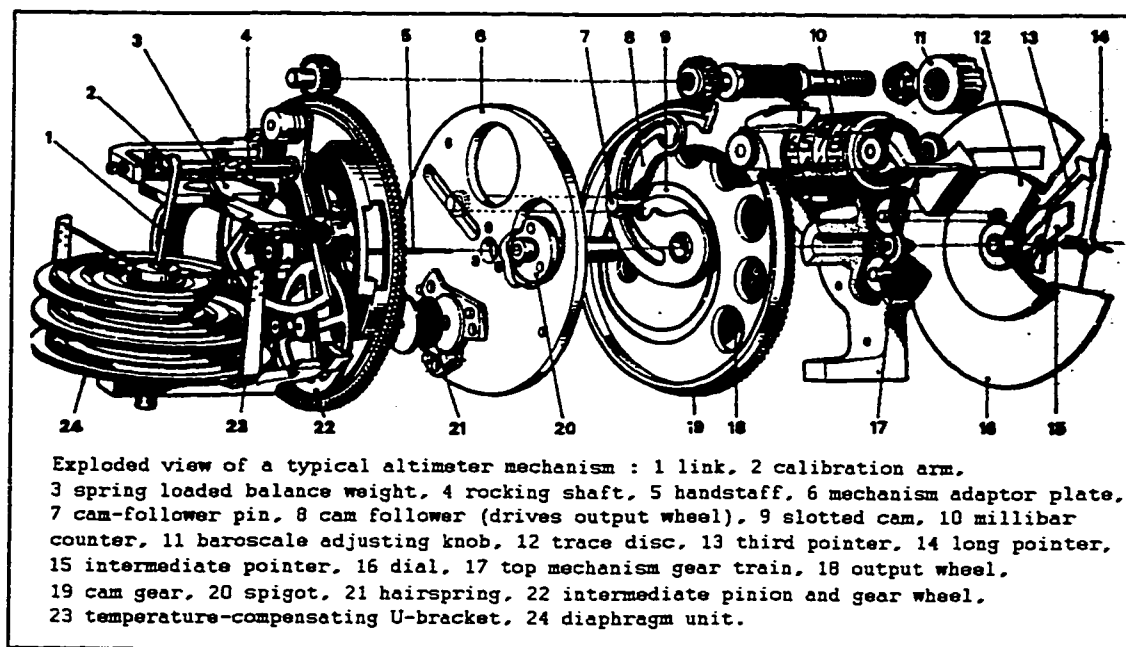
Exploded view of a typical altimeter. [4.3]
